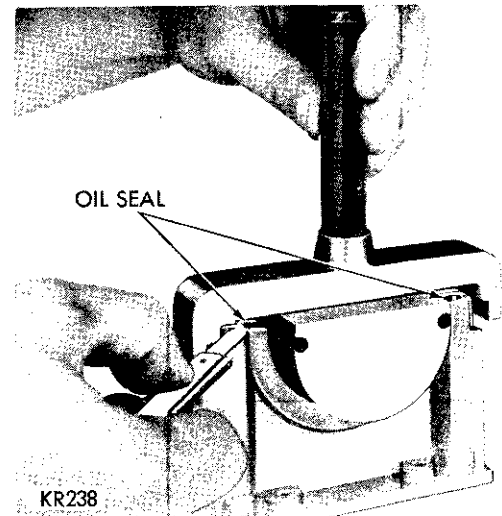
Trimming Rear Main Bearing Lower Oil Seal
